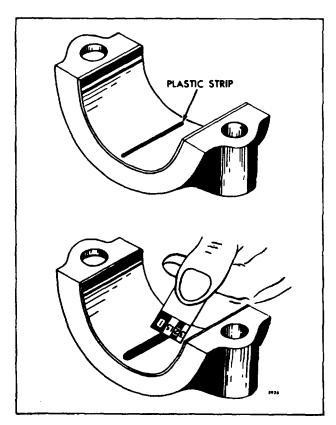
Using Plastic Strip to Measure Bearing-to-Crankshaft Clearance
